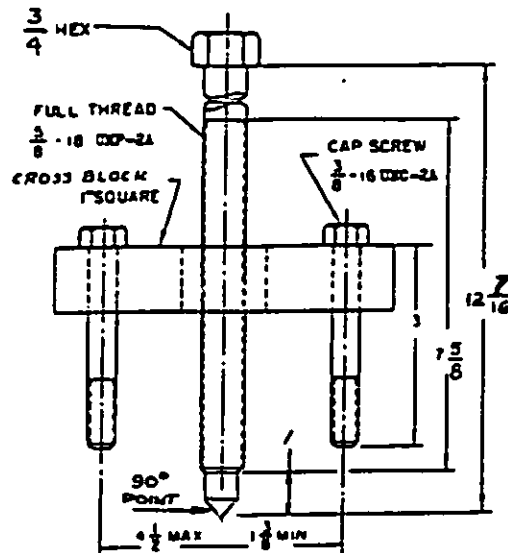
Type VIII, puller, mechanical, gear and pulley.
